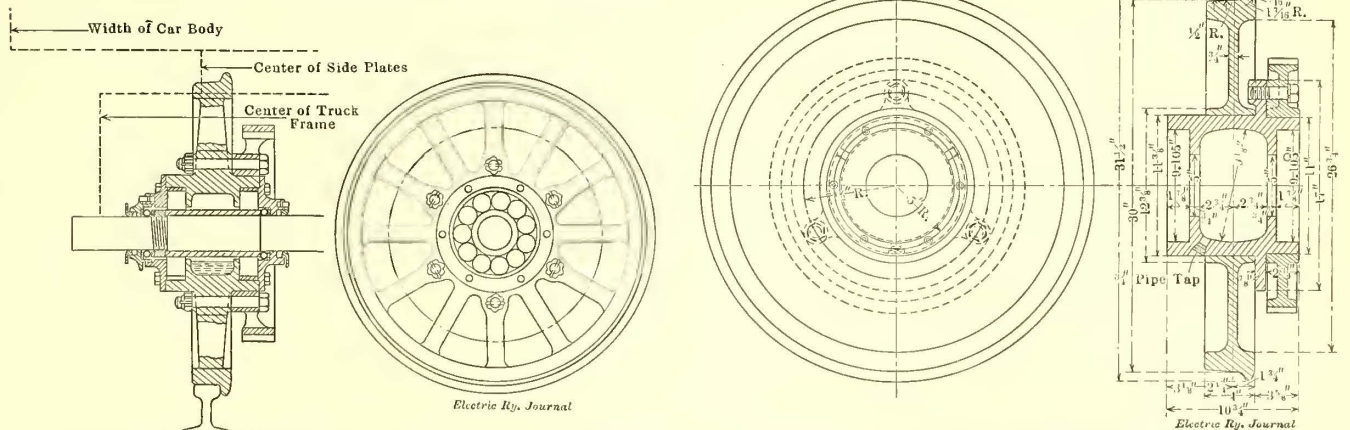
Roller-Bearing Car Wheel with Extended Axle
